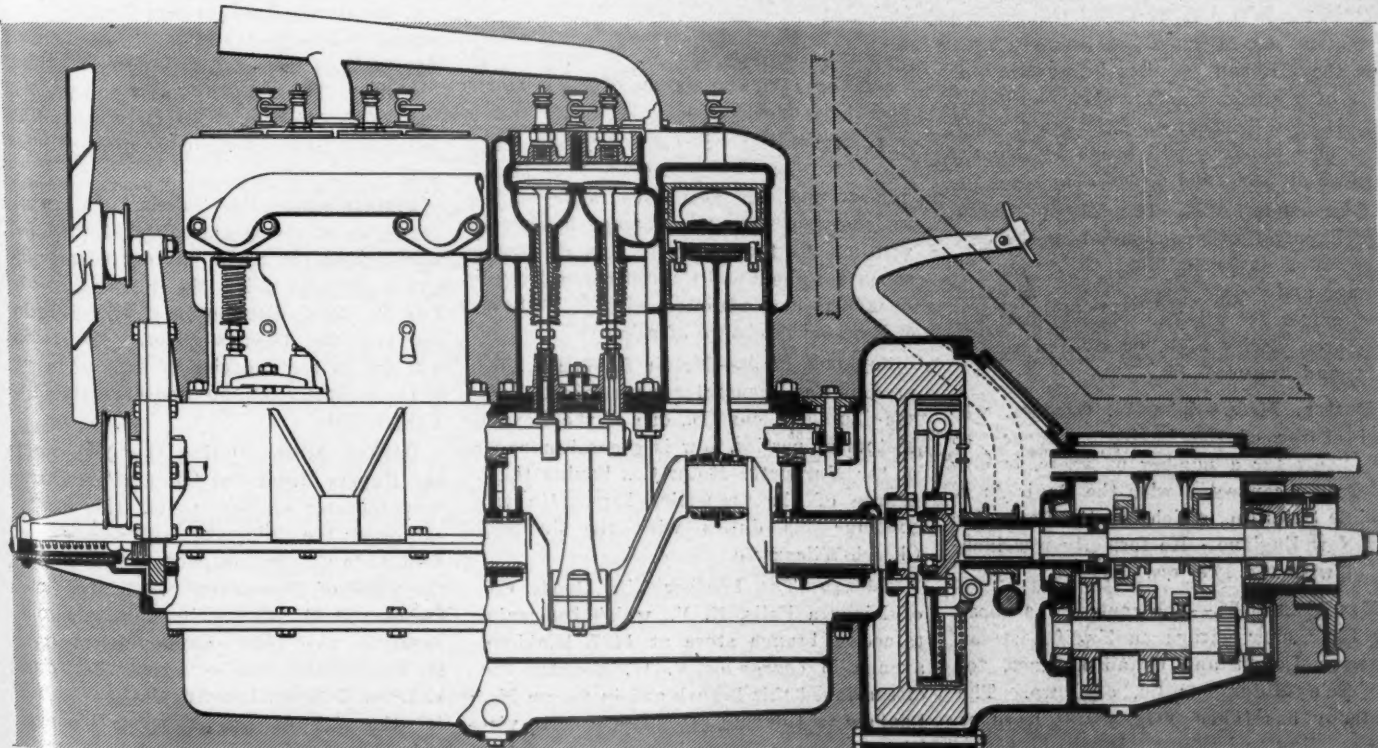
SIDE ELEVATION AND SECTION OF FORT WAYNE UNIT MOTOR AND GEARSET FOR 1911 MARKET
